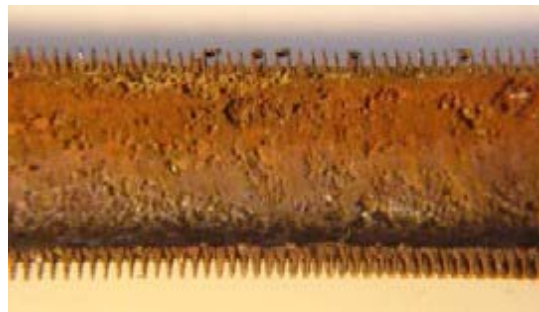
Copper tru-fin tube from Condenser section. Massive I.D. corrosion
